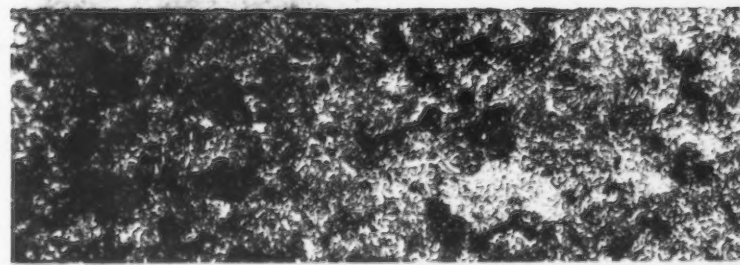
COMPLETELY SUPERFINISHED PROFILE;
